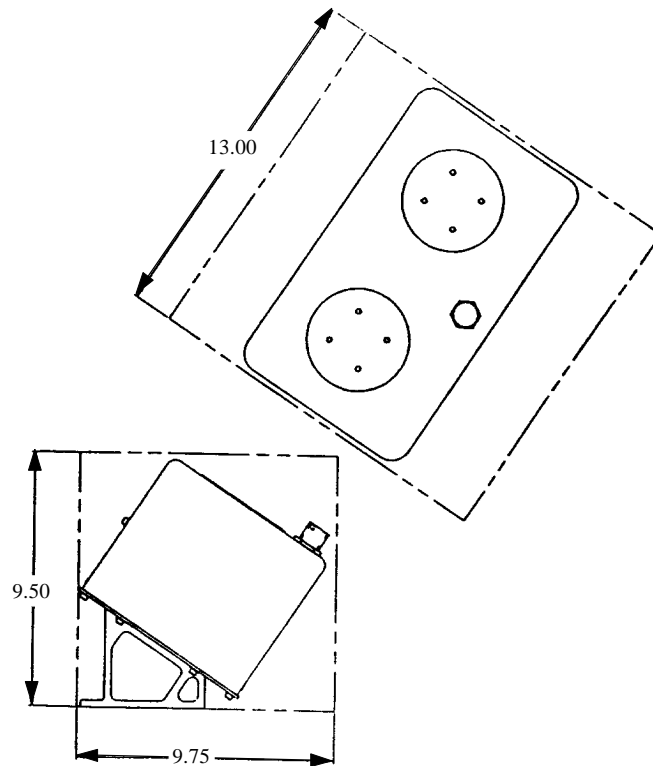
Third Stage Retro Motor Assembly (Double Motors)
